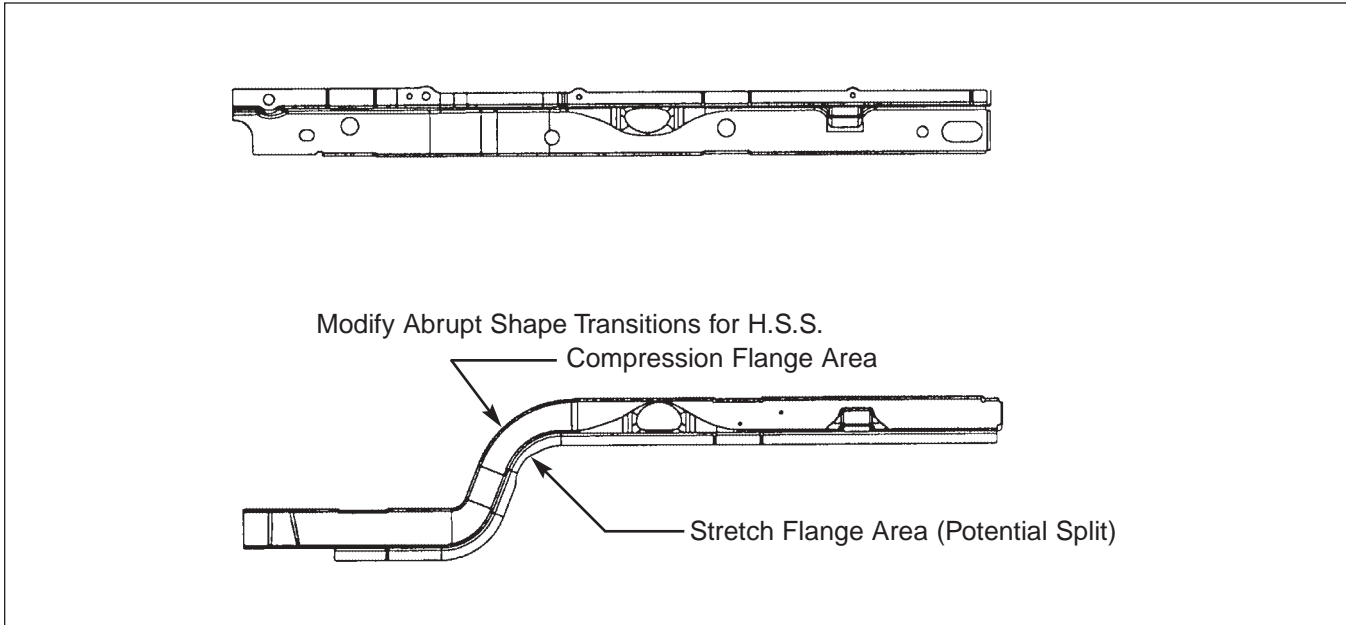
Marginal Part Design for H.S.S. - Part has stretch & compression flanges & Inconsistent Depth. Dimensional control will be a problem for higher strength grades. Stretch & compression stresses on opposite sides of channel shaped parts will cause part to twist.
